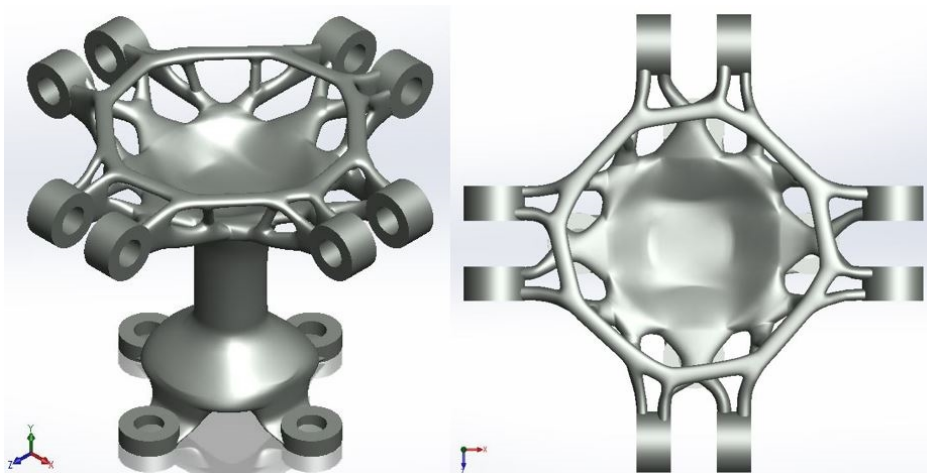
Propeller hub iso and top (.step model in SolidWorks)
